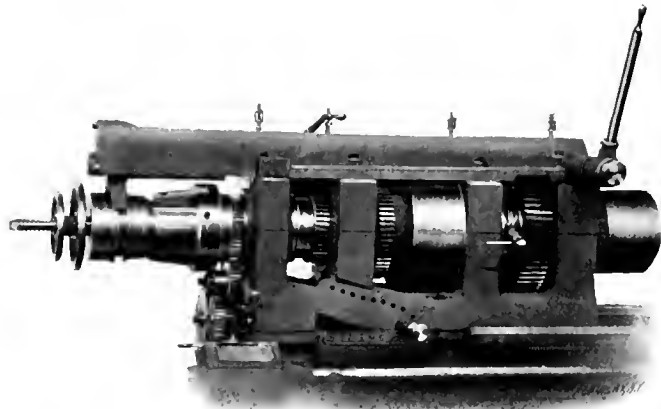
The Head-stock of the 4 by 48-inch Marvel Lathe with Covers Removed showing Details of Head Construction
